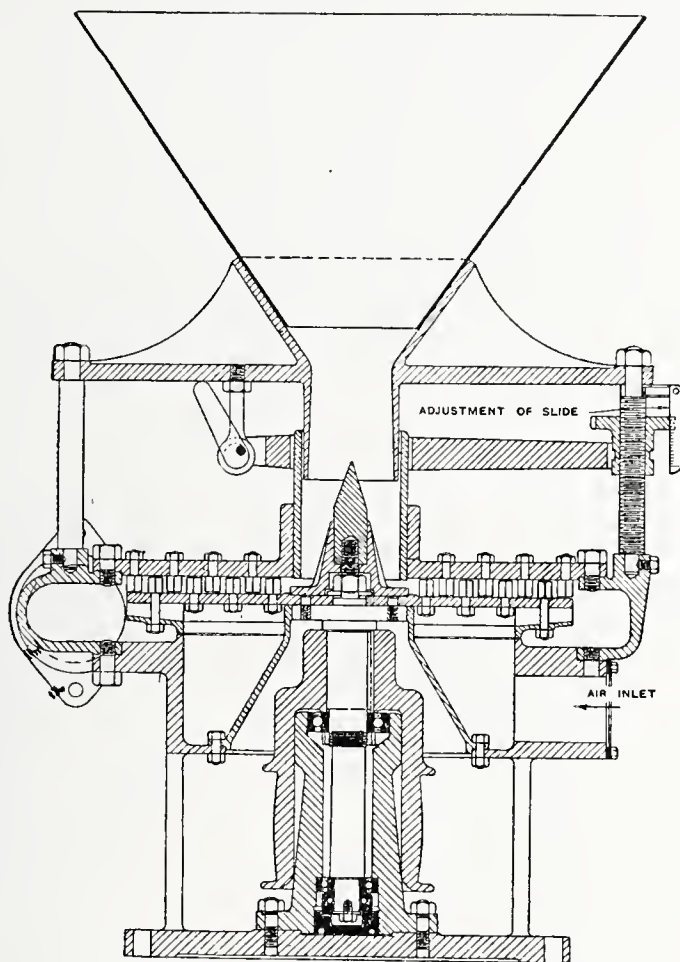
Sectional View of the Brierley Self-contained Pulveriser Unit.
